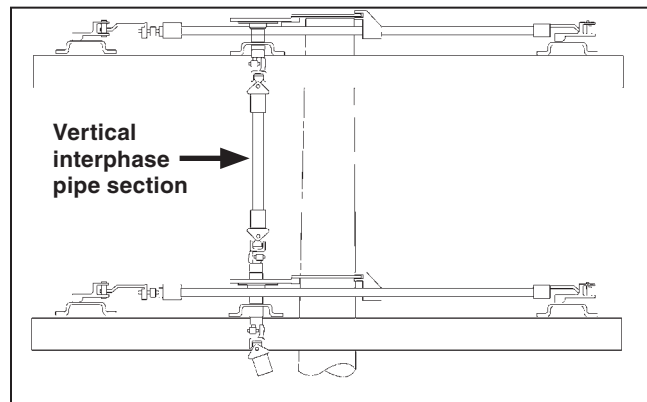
Interphase pipe connecting the outboard bearing assemblies.
